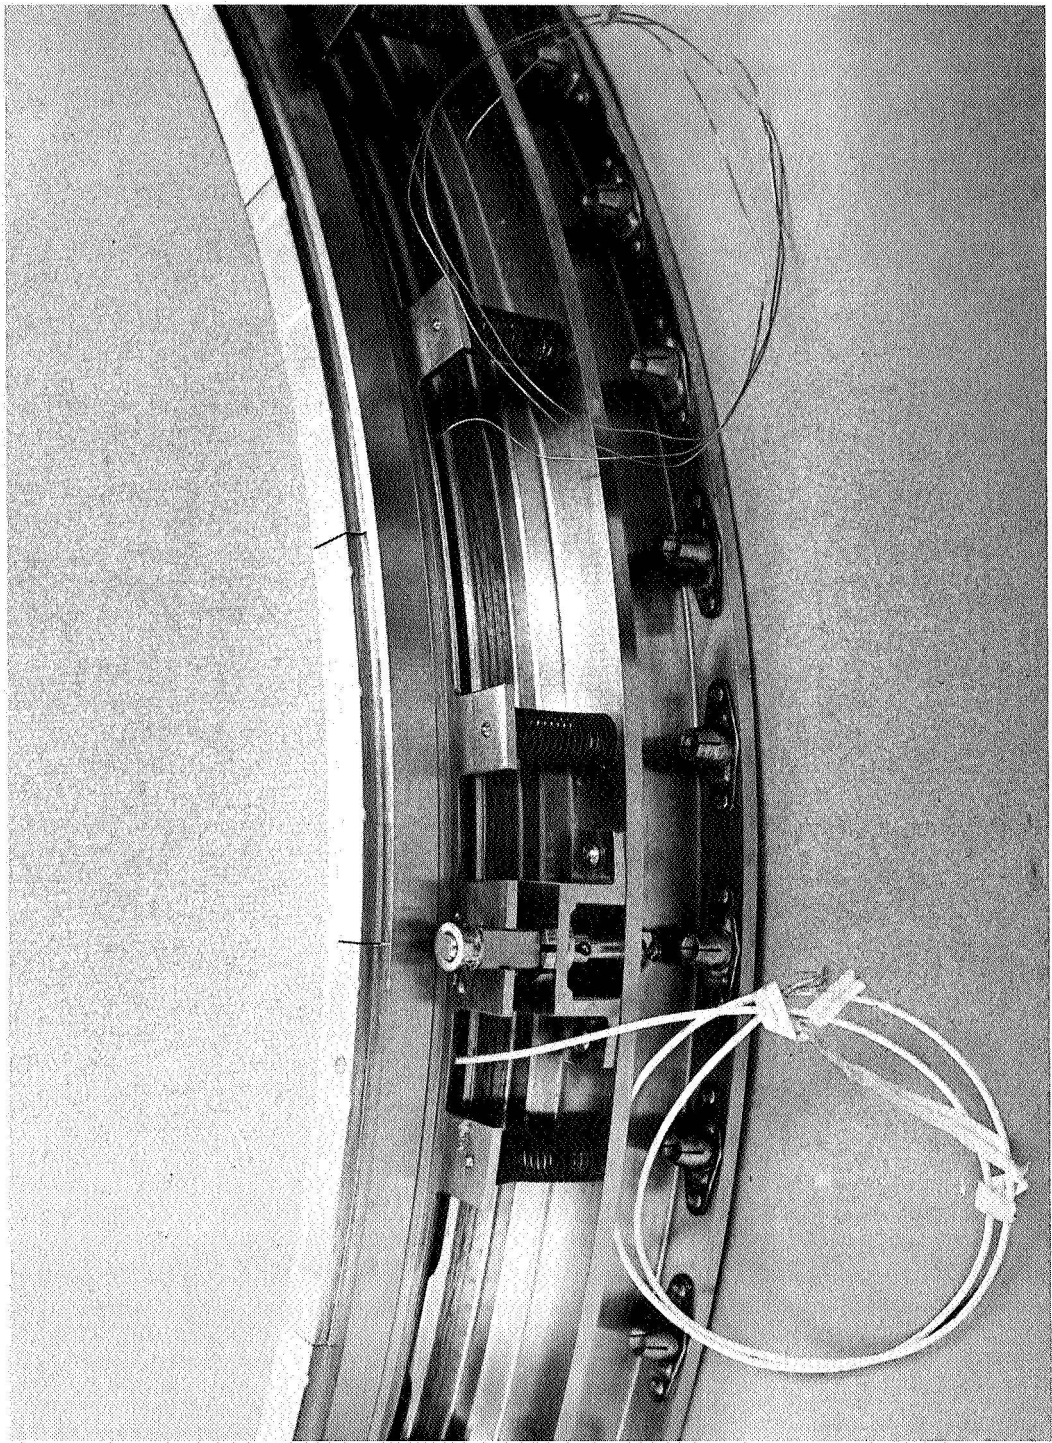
Side View of the One-Side Floated-Shoe End Seal (CN-14386)
